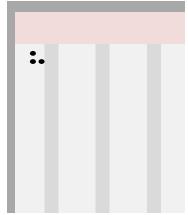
Proper Braille Text Location (Top View of 1612 Pro Engraver Table is illustrated)
